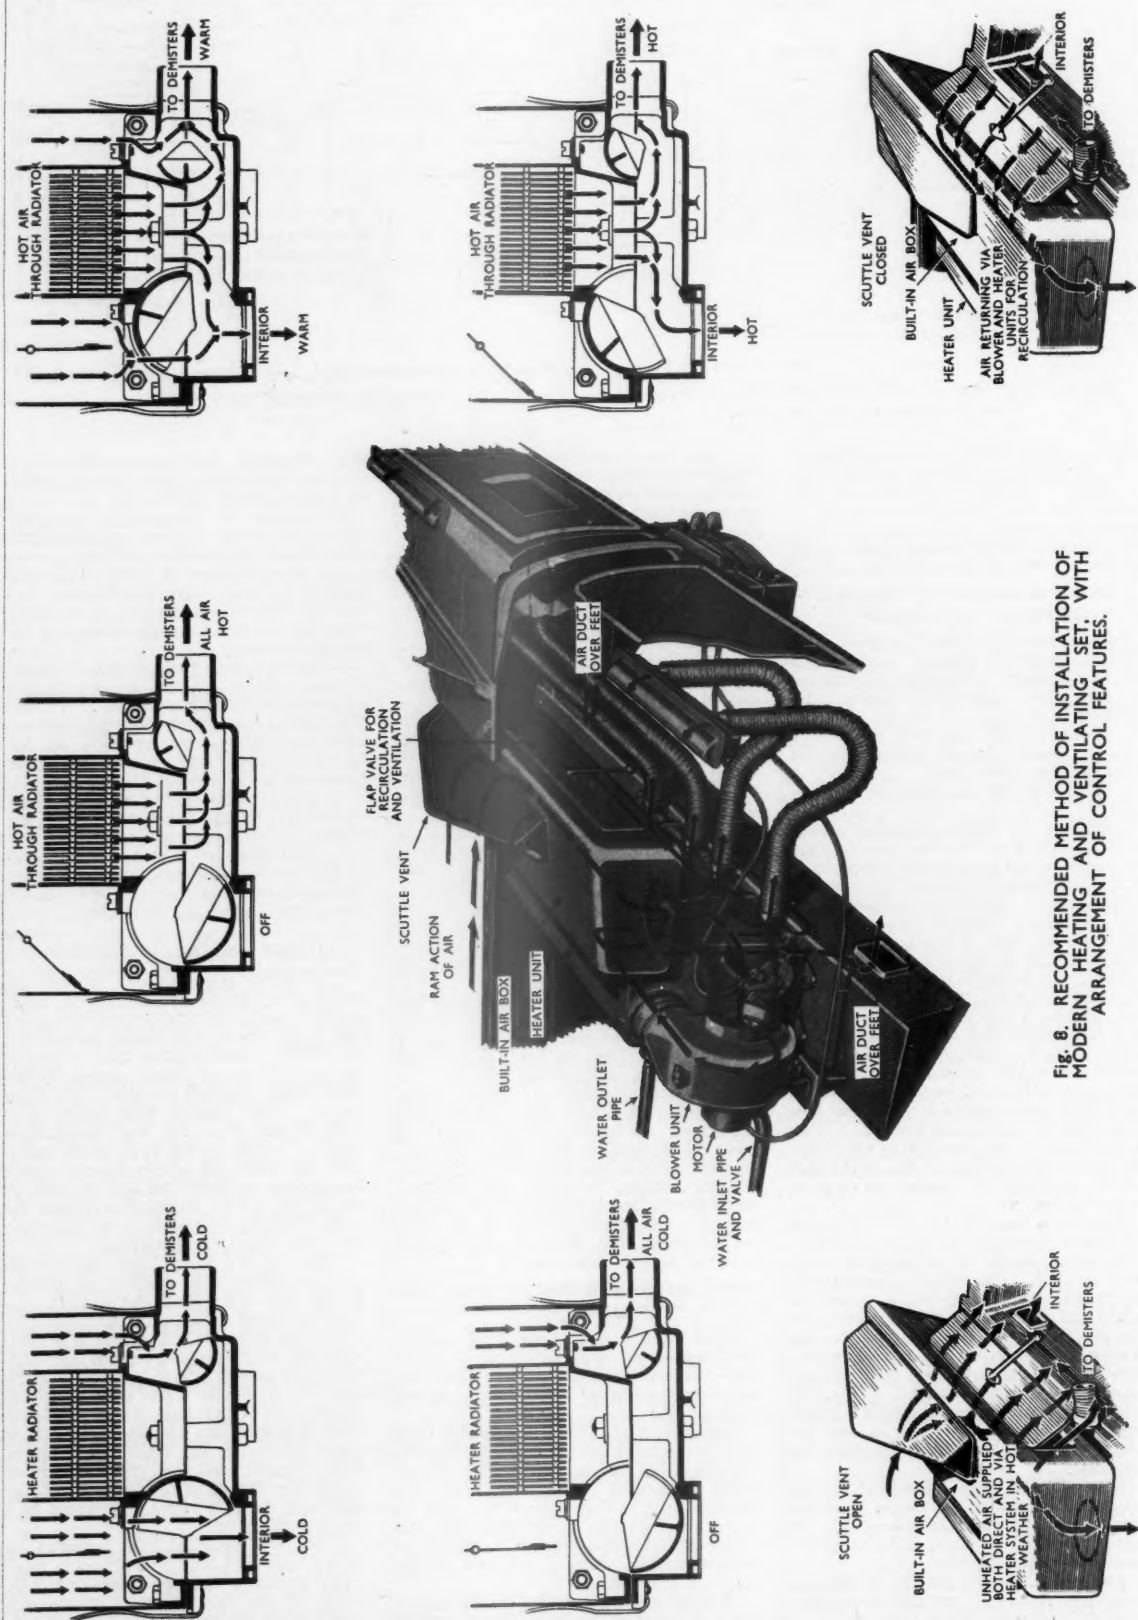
RECOMMENDED METHOD OF INSTALLATION OF MODERN HEATING AND VENTILATING SET, WITH ARRANGEMENT OF CONTROL FEATURES.
